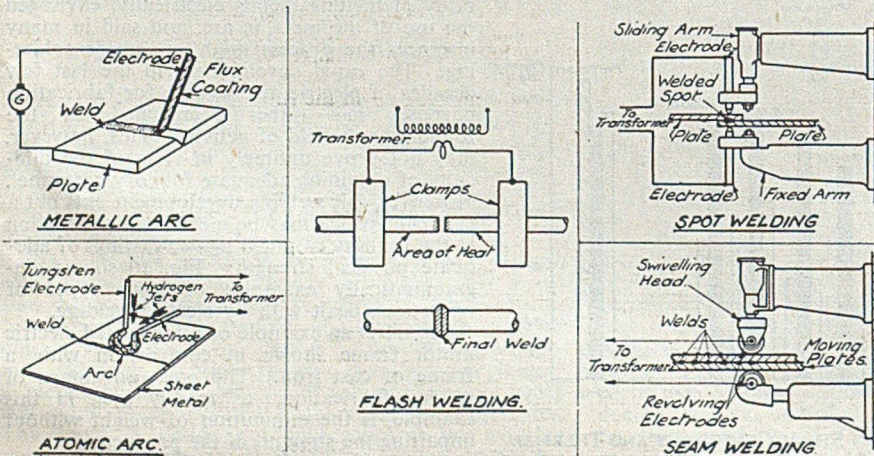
ELECTRIC WELDING PROCESSES.
